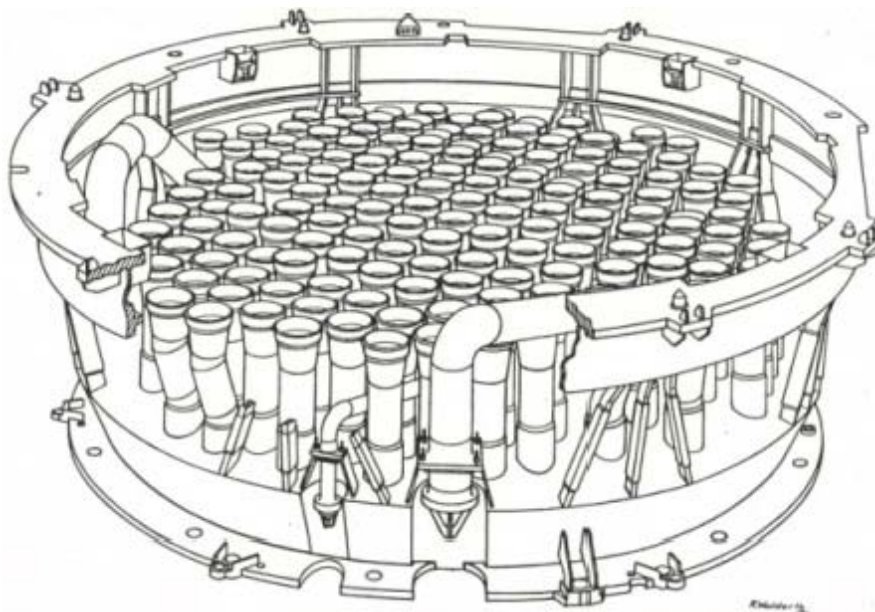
Illustration showing the Core Shroud Head in principles.
